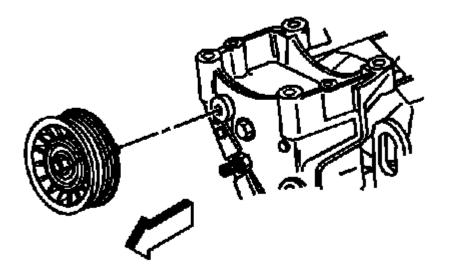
View Of Drive Belt Idler Pulley (W/O Air Conditioning) Courtesy of GENERAL MOTORS CORP.
